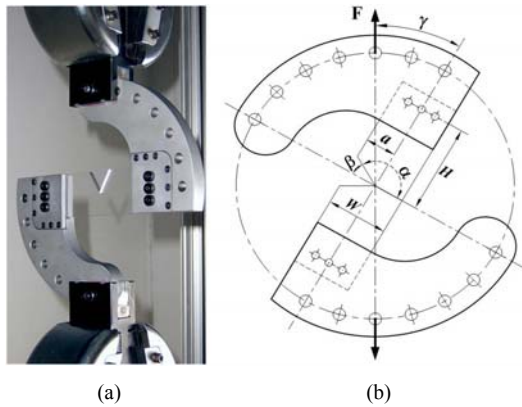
Photograph and configuration of the loading fixture with a V-notch specimen.
